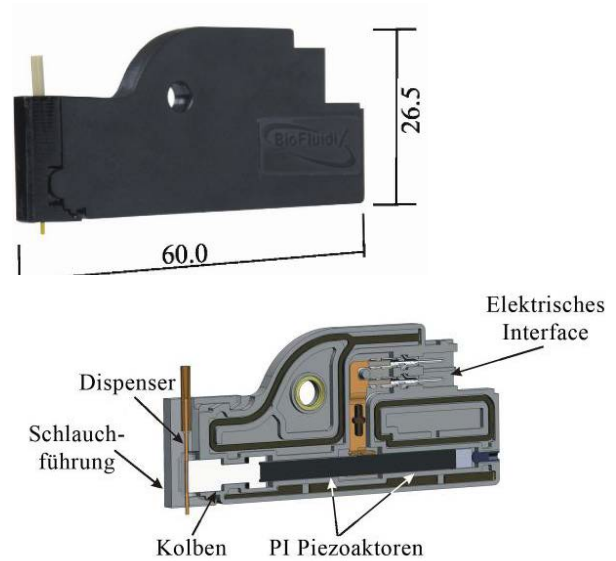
Cross-section through a PipeJet (Image: Biofluidix)
